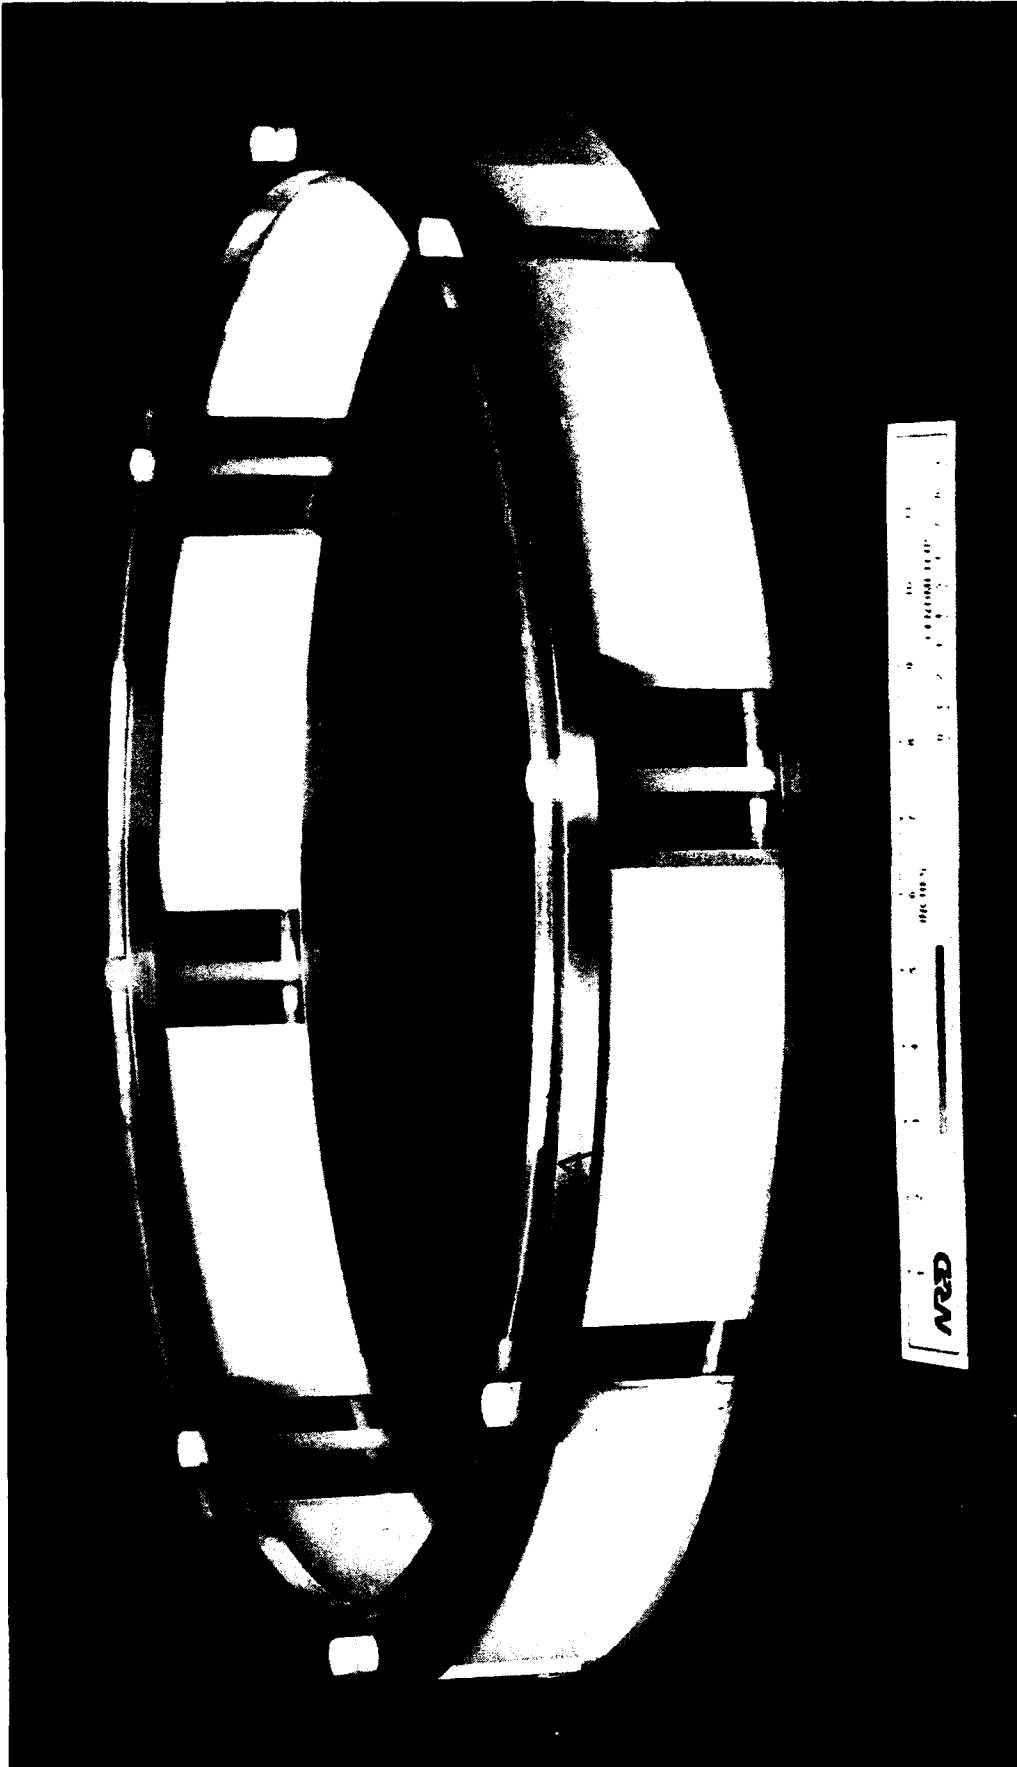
Assembled ring fixture containing as-fired curved ceramic specimens with cast-in defects.
